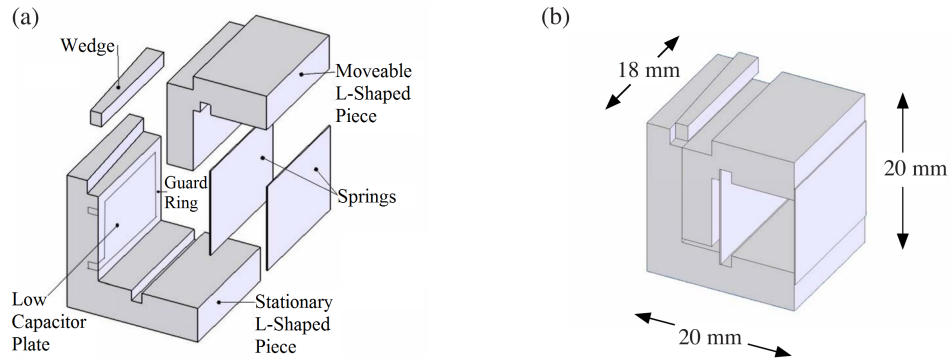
Fused-quartz dilatometer cell. Reprinted from Neumeier *et al.* [109]. (a) Exploded view of the constituent pieces. (b) Fully assembled cell.
